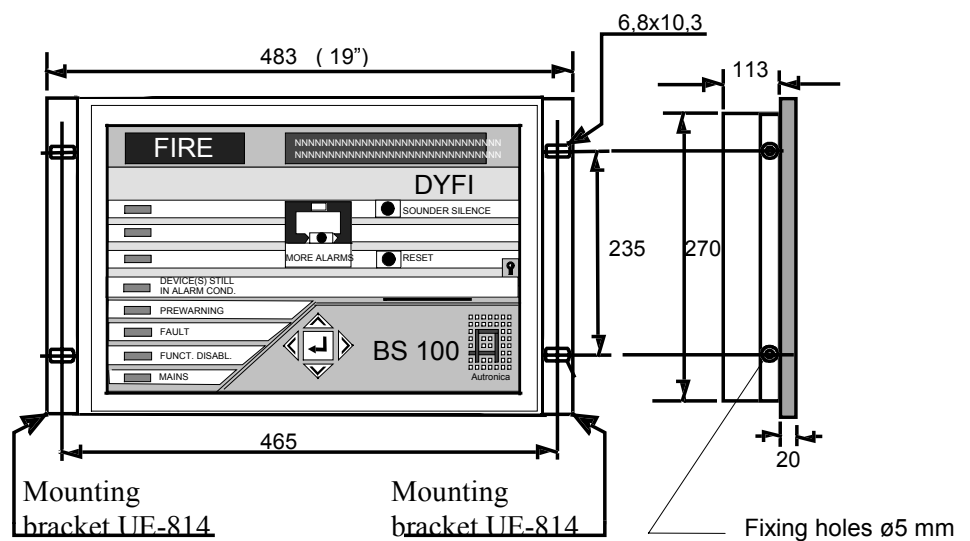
Dimensions (incl. mounting bracket) for mounting in a 19" rack.
